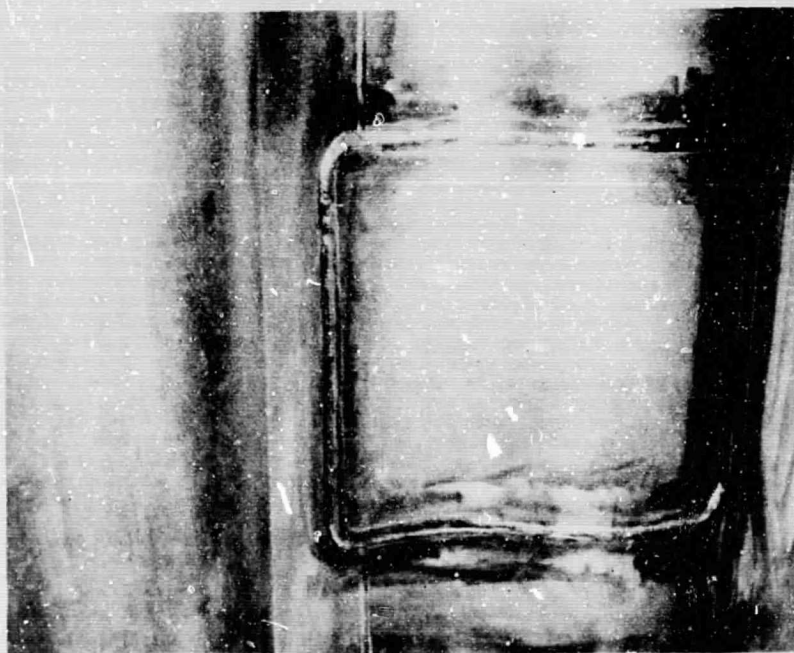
REPAIR PANEL NUMBER 3 WELDED INTO POSITION
